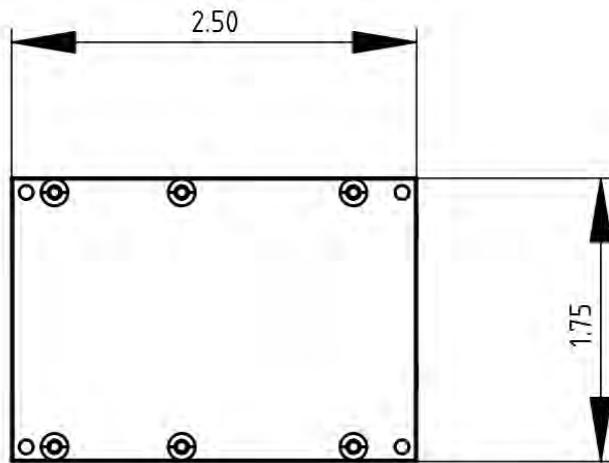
SL5200 OEM Bottom View (Dimensioned)
